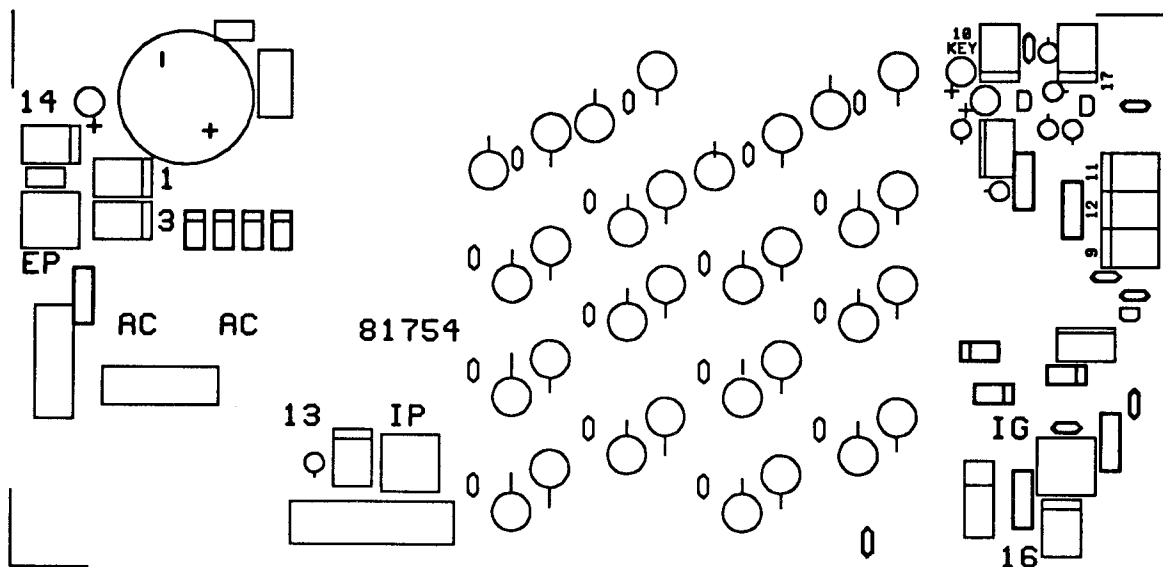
8 HV RECTIFIER BOARD COMPONENT LAYOUT (81754)
